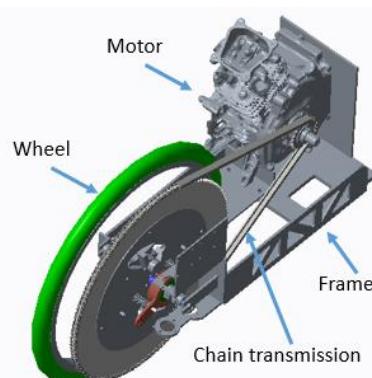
Assembly of the frame including the chain mechanism, wheel of the car and frame.
